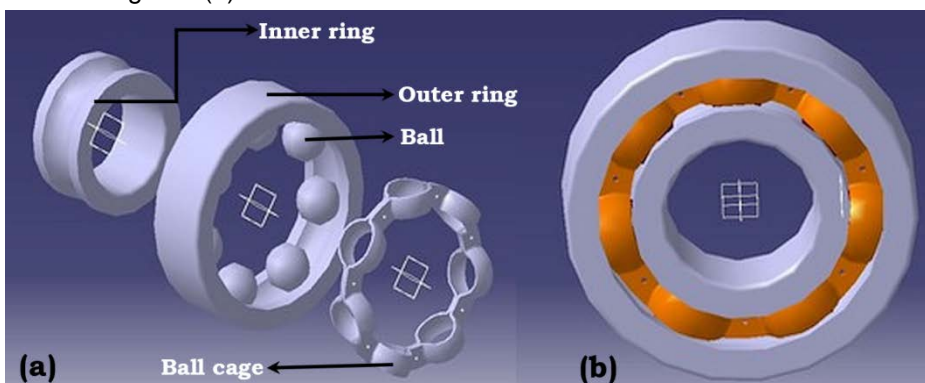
(a) separate components of bearing used in the analysis. (b) Assembled view of bearing.
